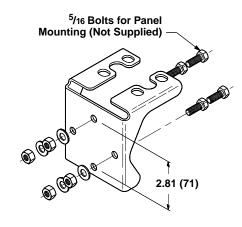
Traditional Flange Mounting Configurations with Optional Brackets for Panel Mounting
